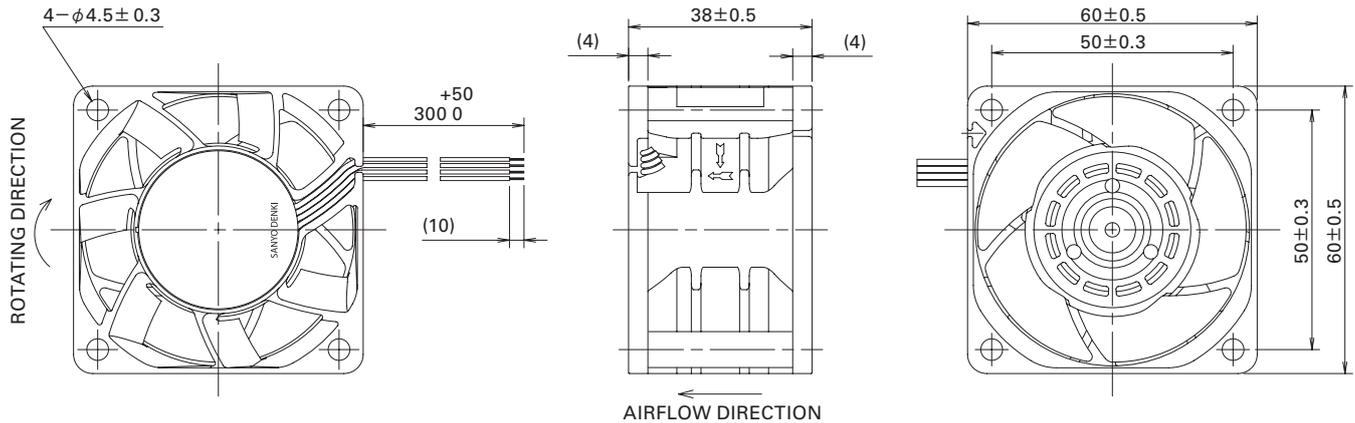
"San Ace 60" GA type dimensions (unit: mm)
